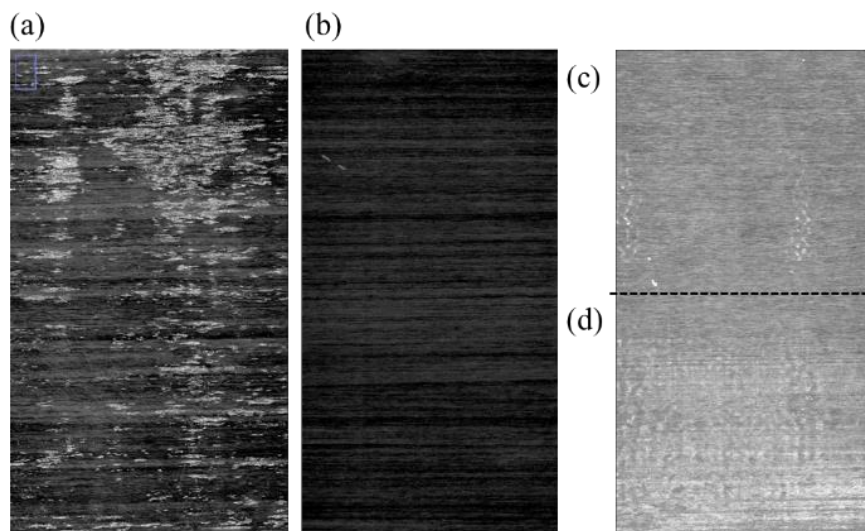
Optical pictures of (a) PC/CF plate, (b) PC/CF plate consolidated with a PEI foil, (c) top and (d) bottom half of a PAEK/CF plate.
